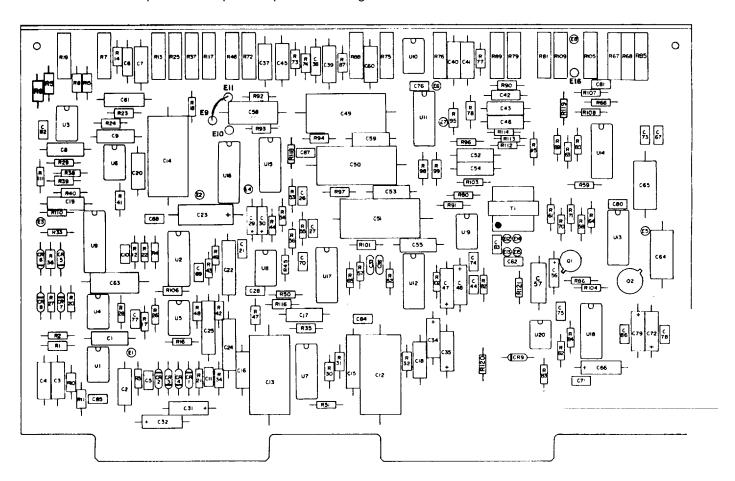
XMTR/RCVR Voice Buffer Circuit Card Assembly, 1A2A5
